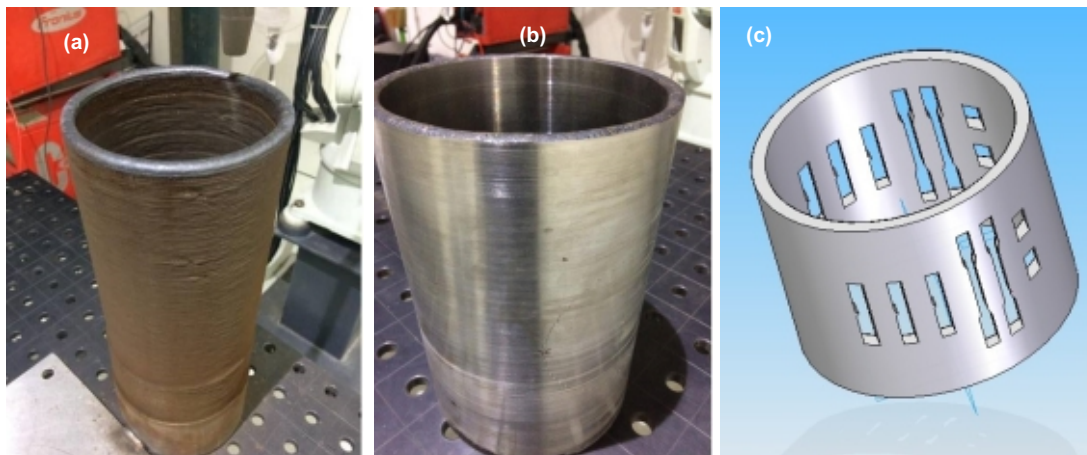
(a) As deposited component; (b) Machined component; (c) Specimen extraction
